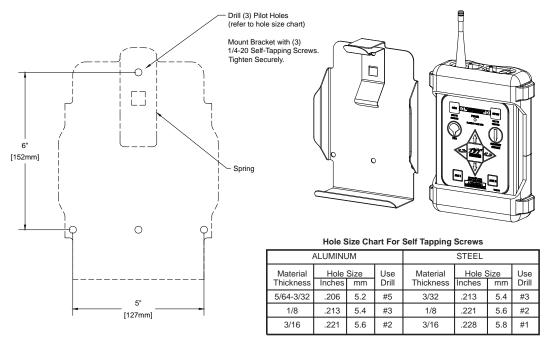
Wireless Operator Station Storage Bracket Hole Dimensions
